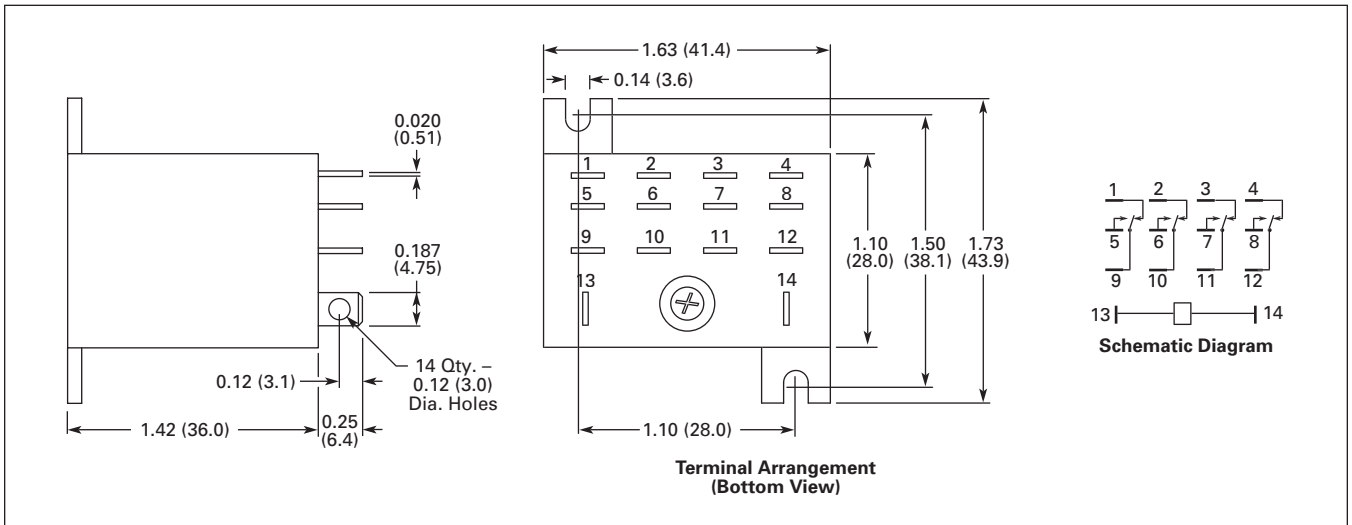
D7PR44 — Approximate Dimensions in Inches (mm)
